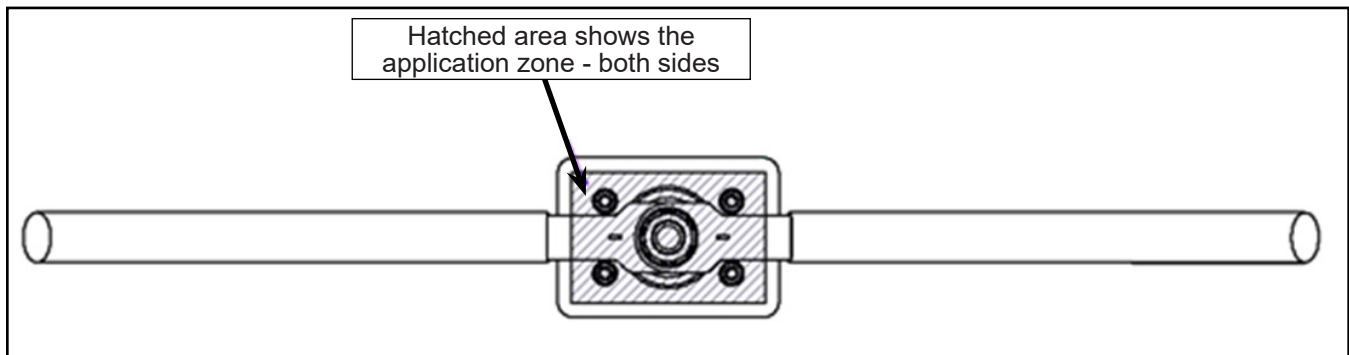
Junction Block Assembly Showing Corrosion Preventative Product Application Area on Both Sides
